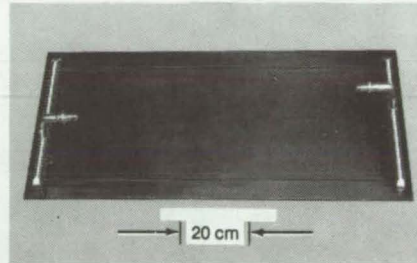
A Completed Panel with coolant manifolds affixed is shown here. Panels are aged to T-6 temper.
